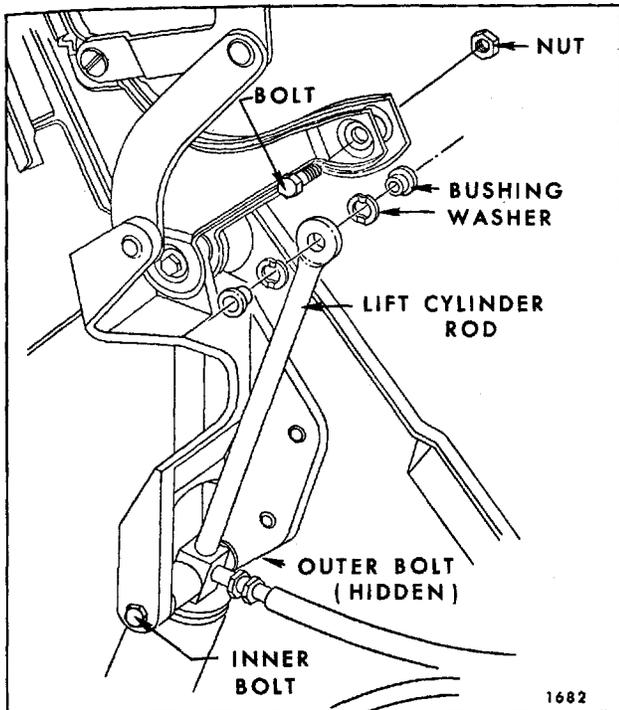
"B and C" Body Hydraulic Lift Cylinder Attachment
